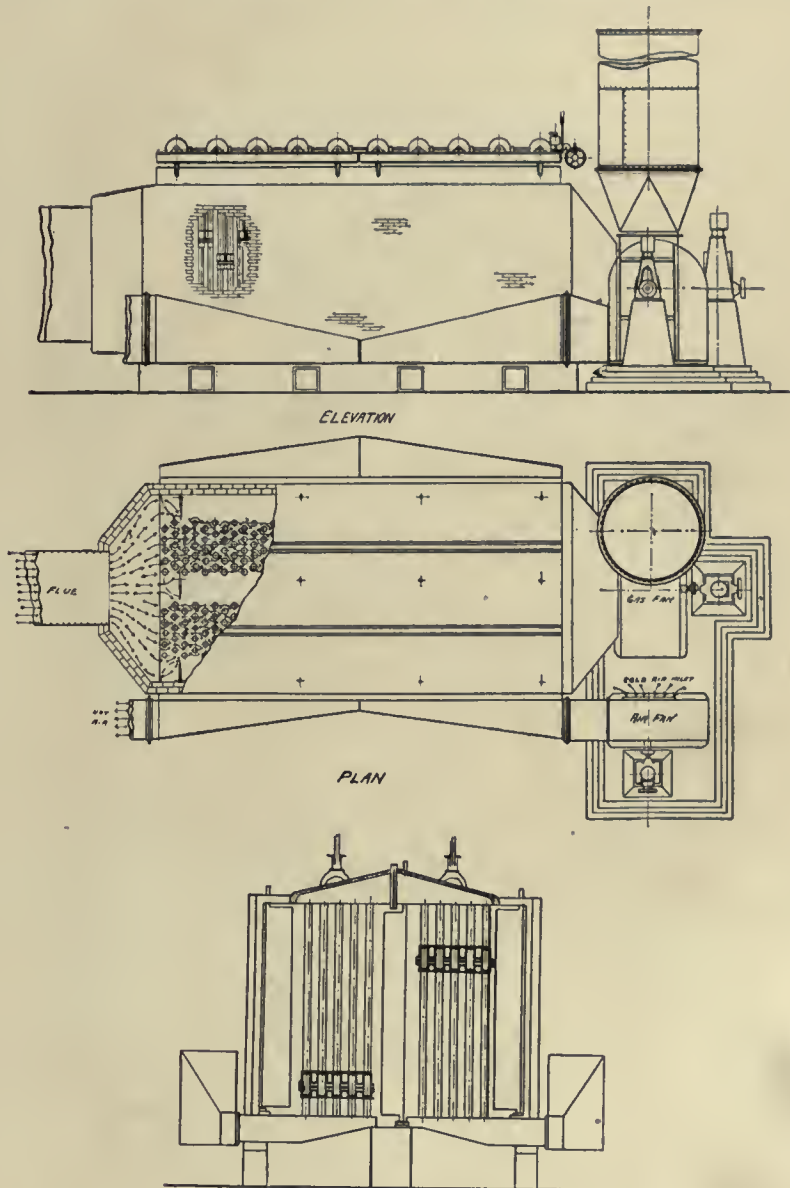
Sturtevant Air Pre-heater Plant (Elevation, Plan and Cross-section.)
